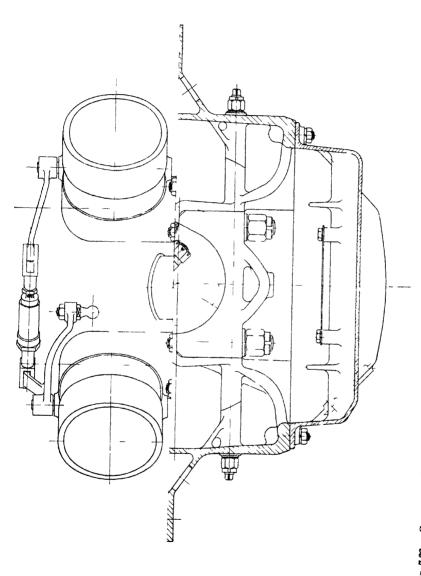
Cross-sectional arrangement of 8-cylinder V-type engine bore 5.4 m, stroke 6 m "Comet Mark III" combustion chamber
